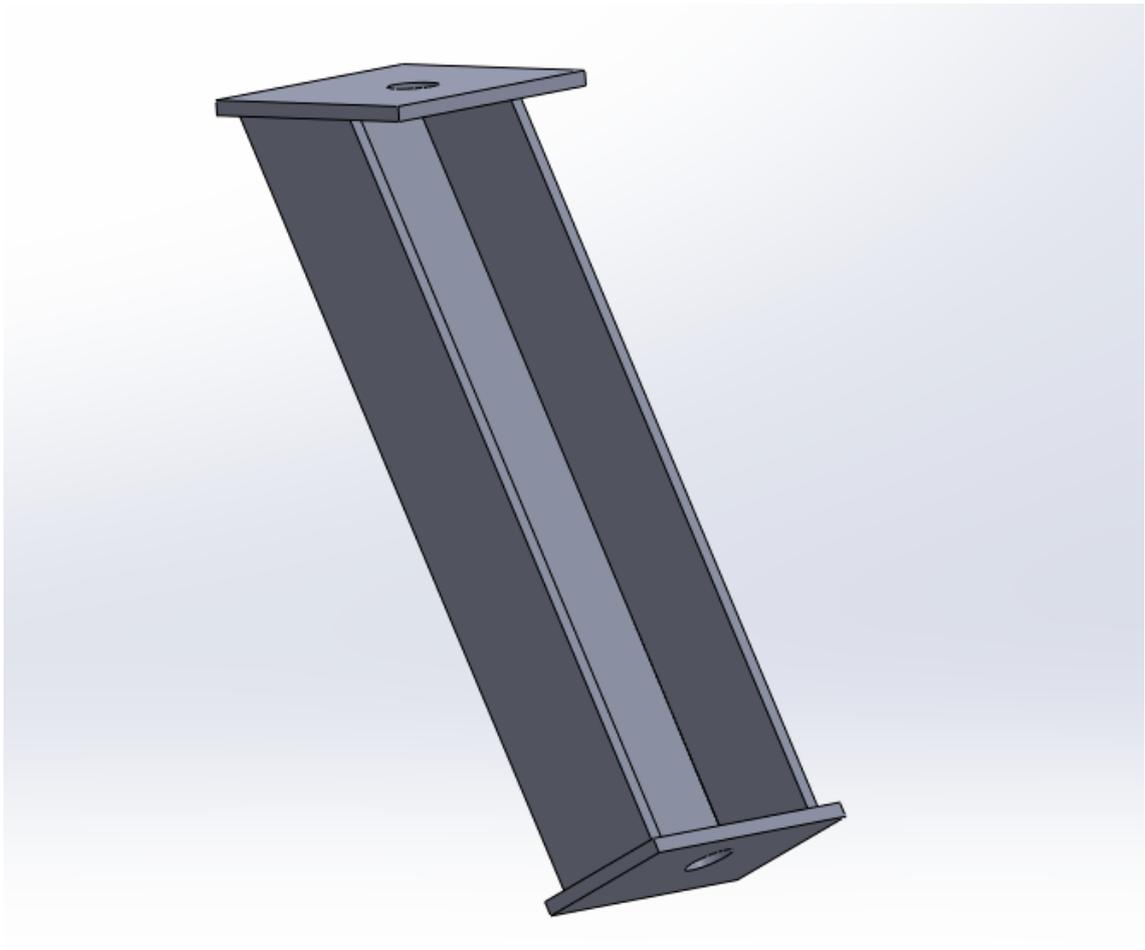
Support for auxiliary mounting platform for mounting components within the REVjet
